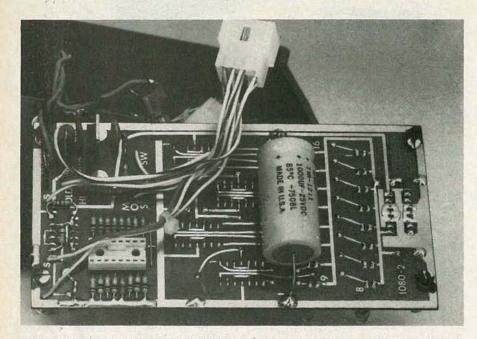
"FOIL-SIDE" of display board. Multi-wire assembly connects to components on panel board.
